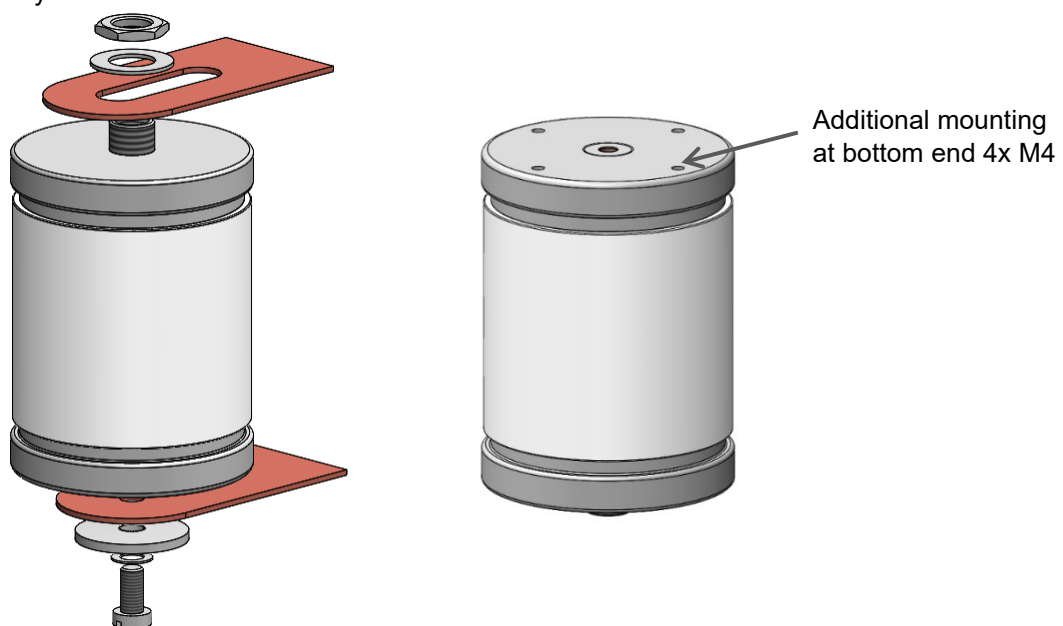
Schematic view of mounting of CTMN E geometry with mounting kit 058-071 and 20055475 (left) and bottom view of the CTMN E geometry 3D model (right)
